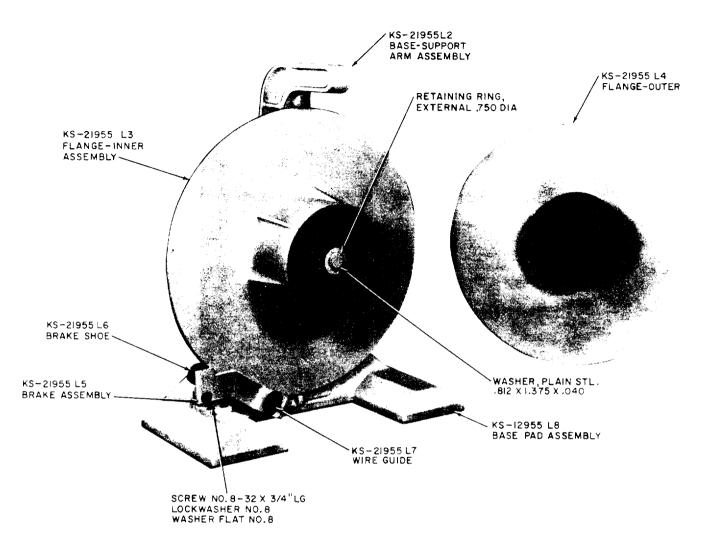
KS-21955 Wire Reel With Outer Flange Removed
